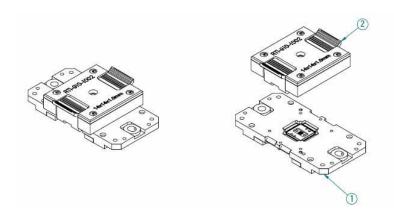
High speed dual channel 6-bit ADC (TQFN packaged) mounting socket: 1 - socket assembly (bottom), 2 - socket lid (top) developed for this work
